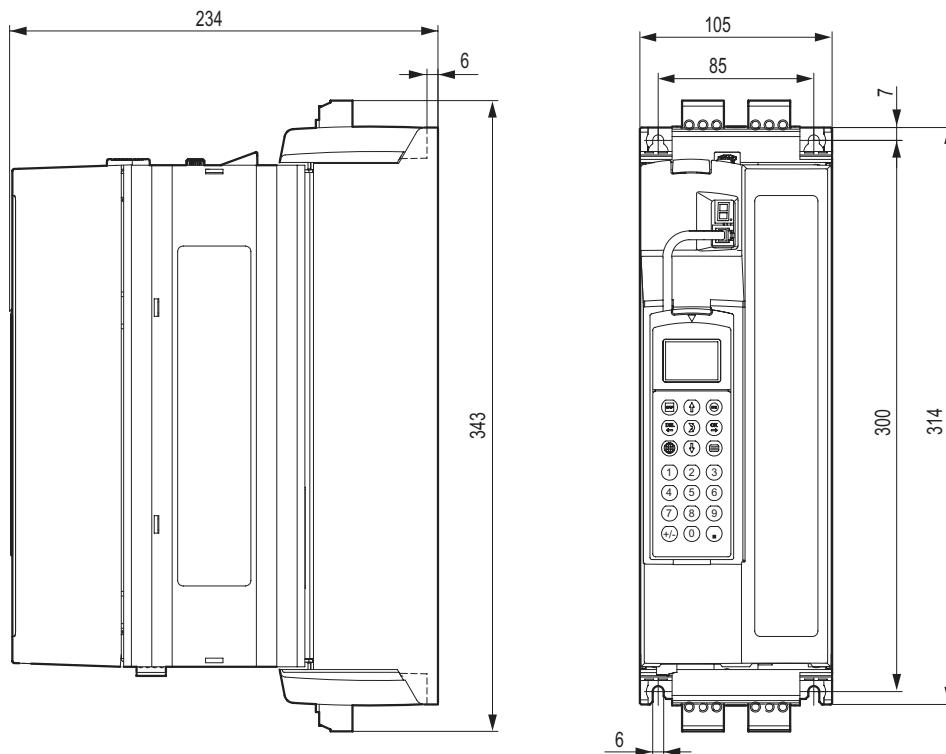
Dimension drawing for MDX61B size 0M, dimensions in mm
